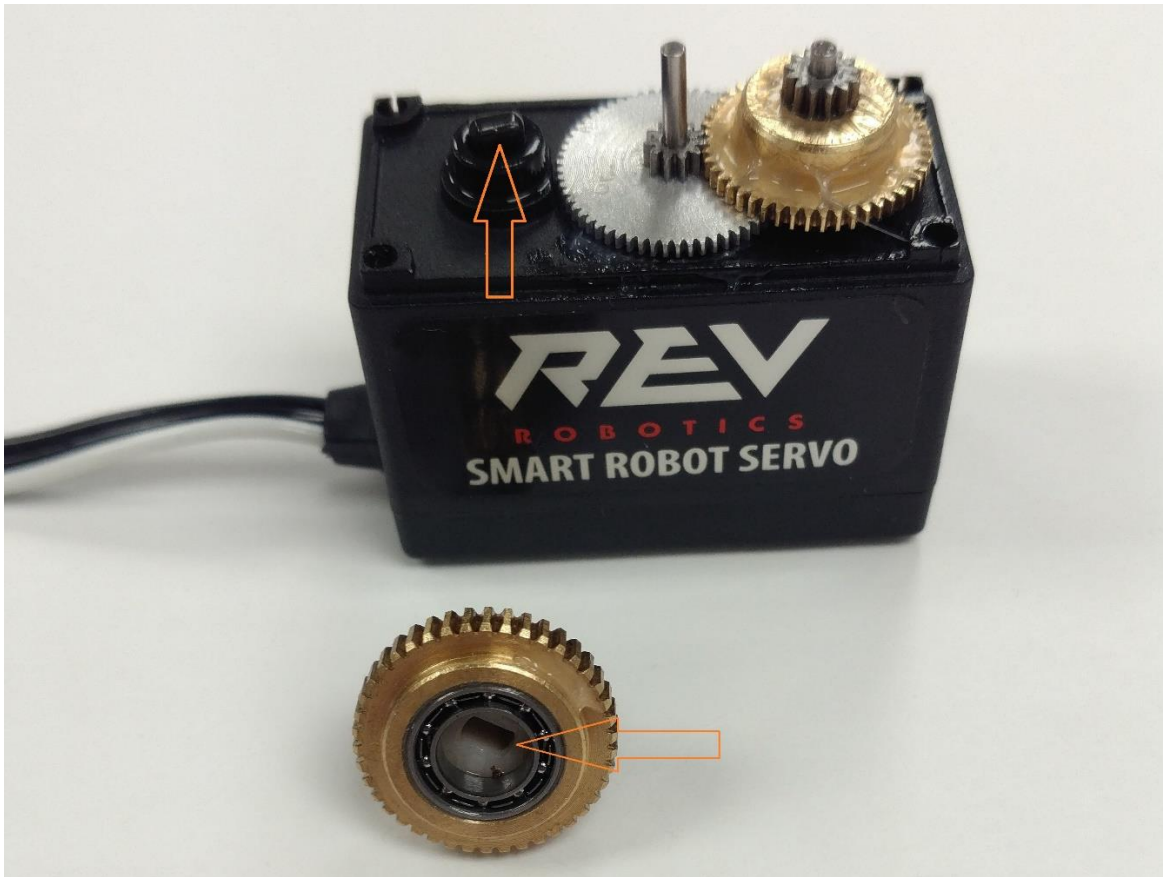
Next place the output shaft gear in position. Make sure to align the slot in the gear with the tab on the servo.
